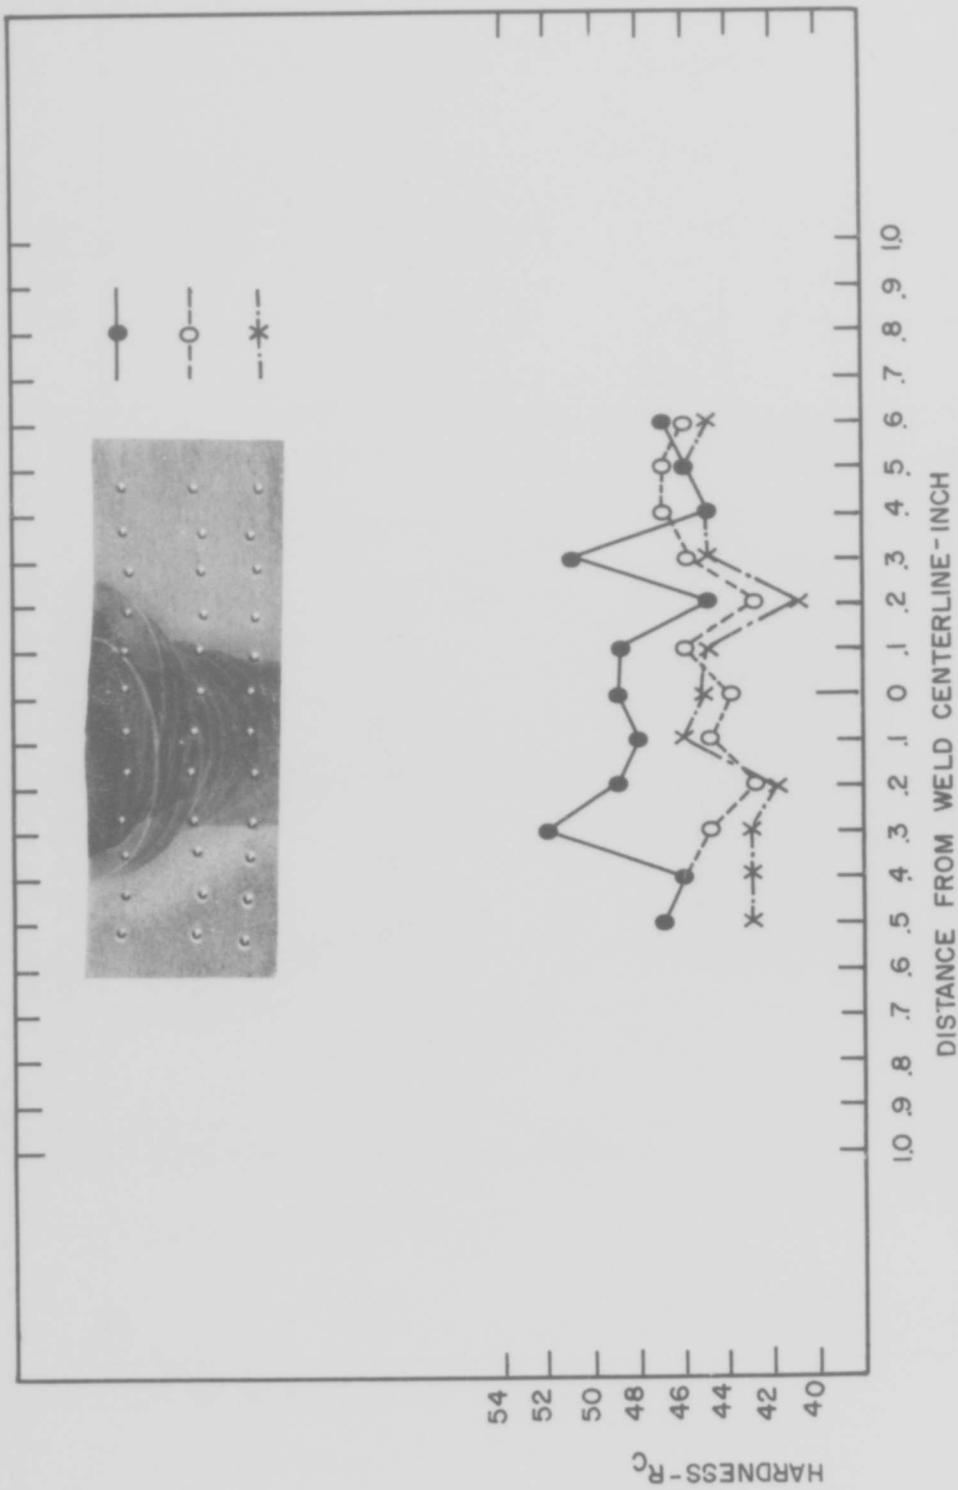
Hardness Survey of TIG Weld No. D235 Made in AMS 6435 Plate Material Tempered at 700°F at a Welding Speed of 10 ipm Using Filler Wire No. 1.
